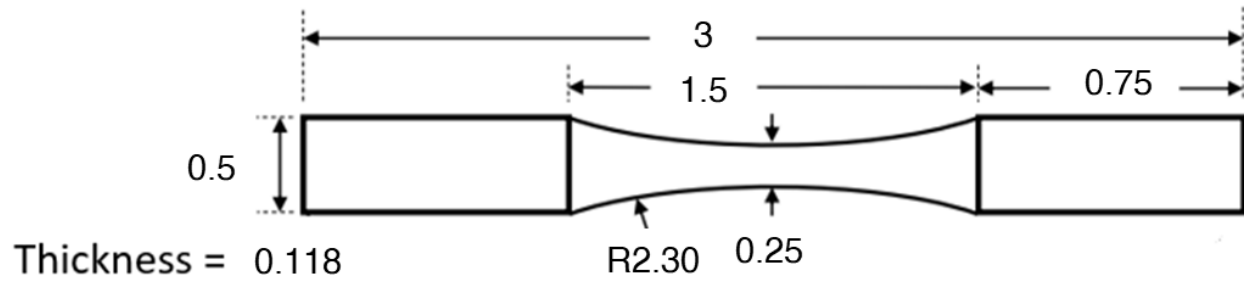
Drawing of the fatigue life specimen with dimensions in inches.
